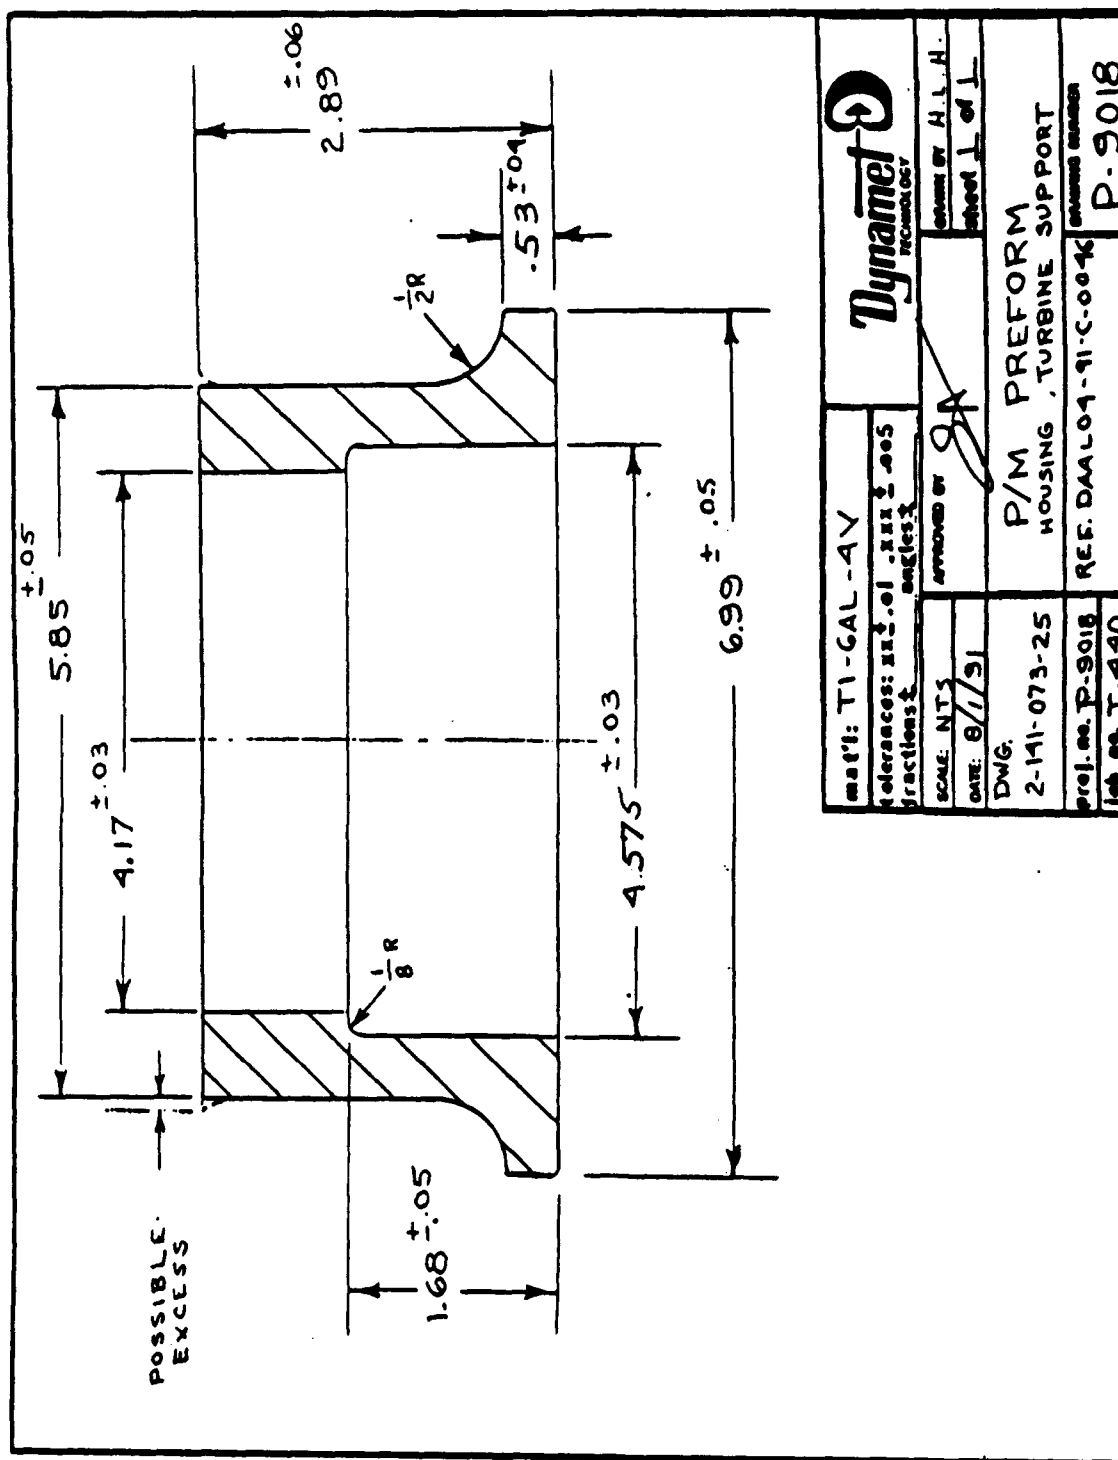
MODIFIED DESIGN OF P/M PREFORM FOR MANUFACTURE OF A REDUCED WEIGHT (7 POUND) TURBINE ENGINE SUPPORT BEARING HOUSING.
